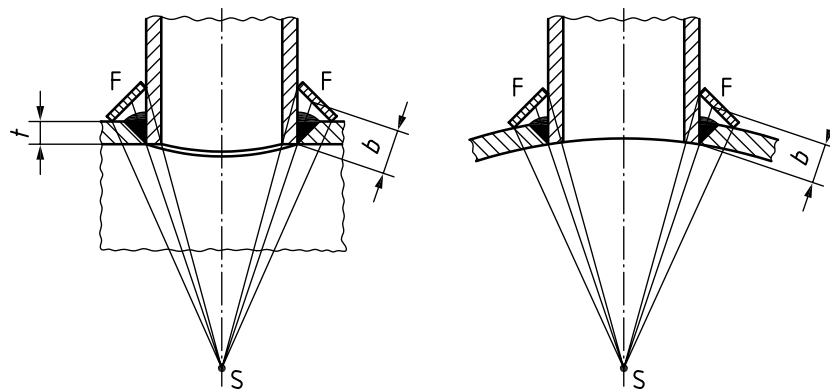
Arrangement for testing of set-in welds with a radiation source, located on the central pipe axis and perpendicular to the weld centre, and the film outside
